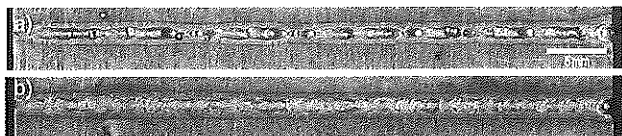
Welding bead sample on C1100 pure copper using 6 kW laser. (a) Original, (b) with beam mode control
